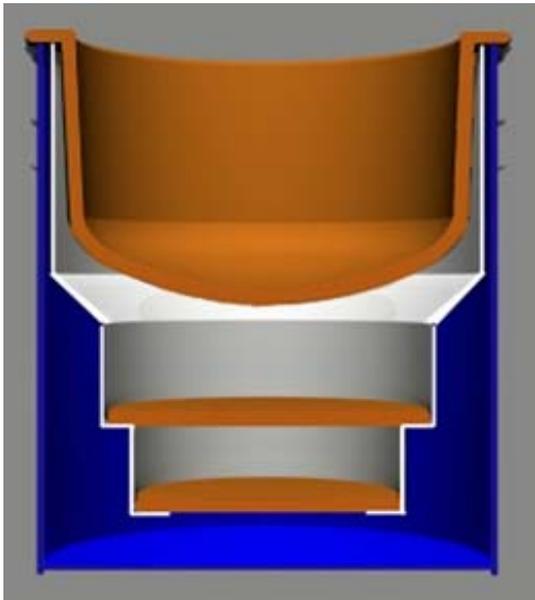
A colored side view of the filter housing in the bucket, with the clay pieces in brown.
